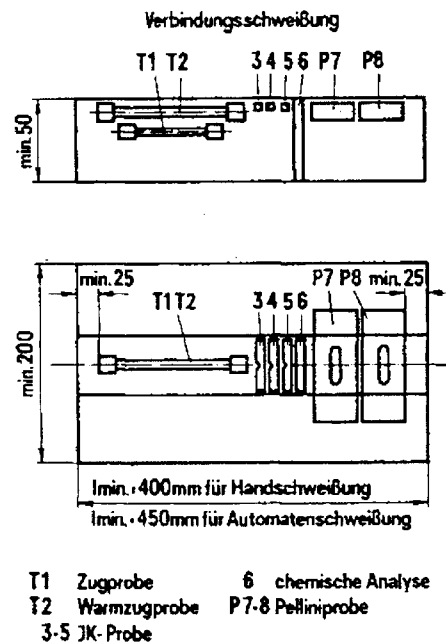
Weld Filler Metal Batch Test Plate For Ferritic Butt Weld
